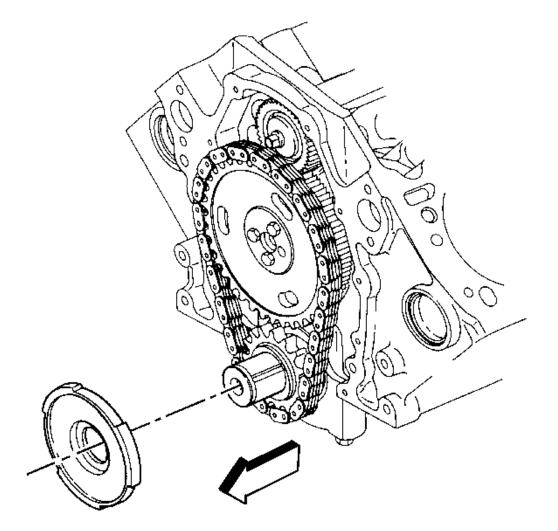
View Of Crankshaft Position Sensor Reluctor Ring Courtesy of GENERAL MOTORS CORP.
